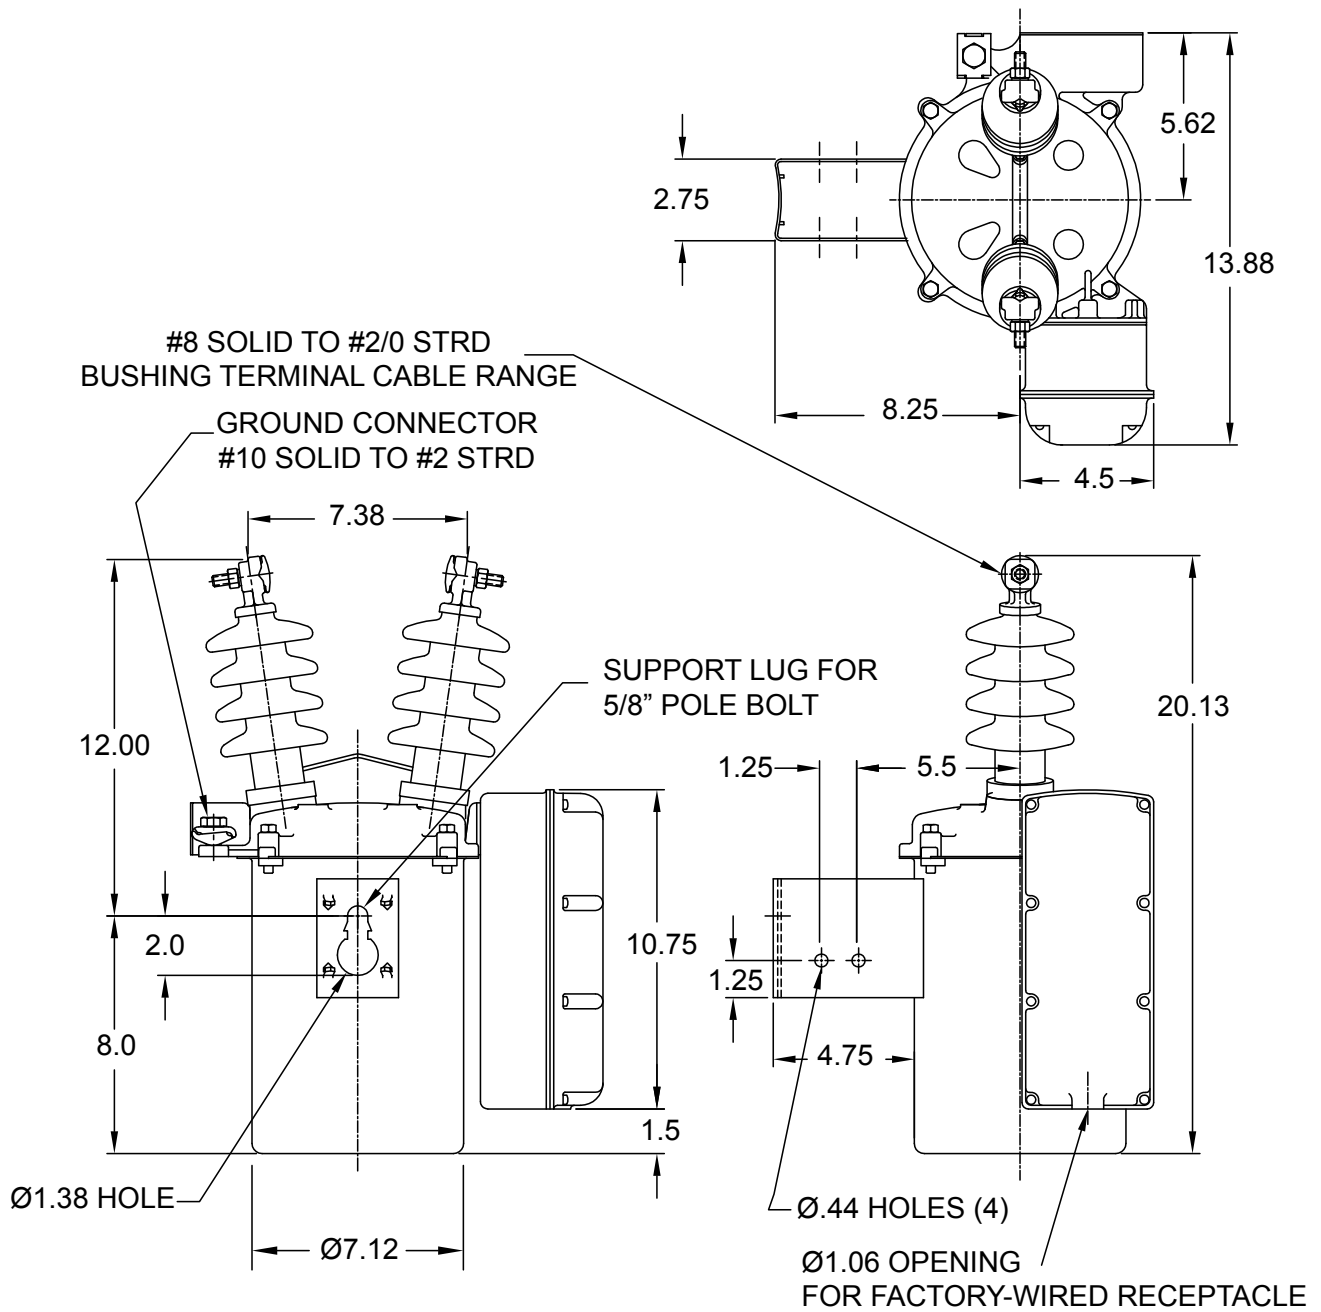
Outline dimensions of 95 kV BIL Type NR oil switch with standard bushings, (15.0 kV Rating ONLY).
